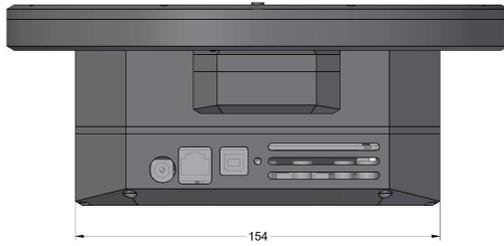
G3 camera head with External filter wheel bottom view dimensions
